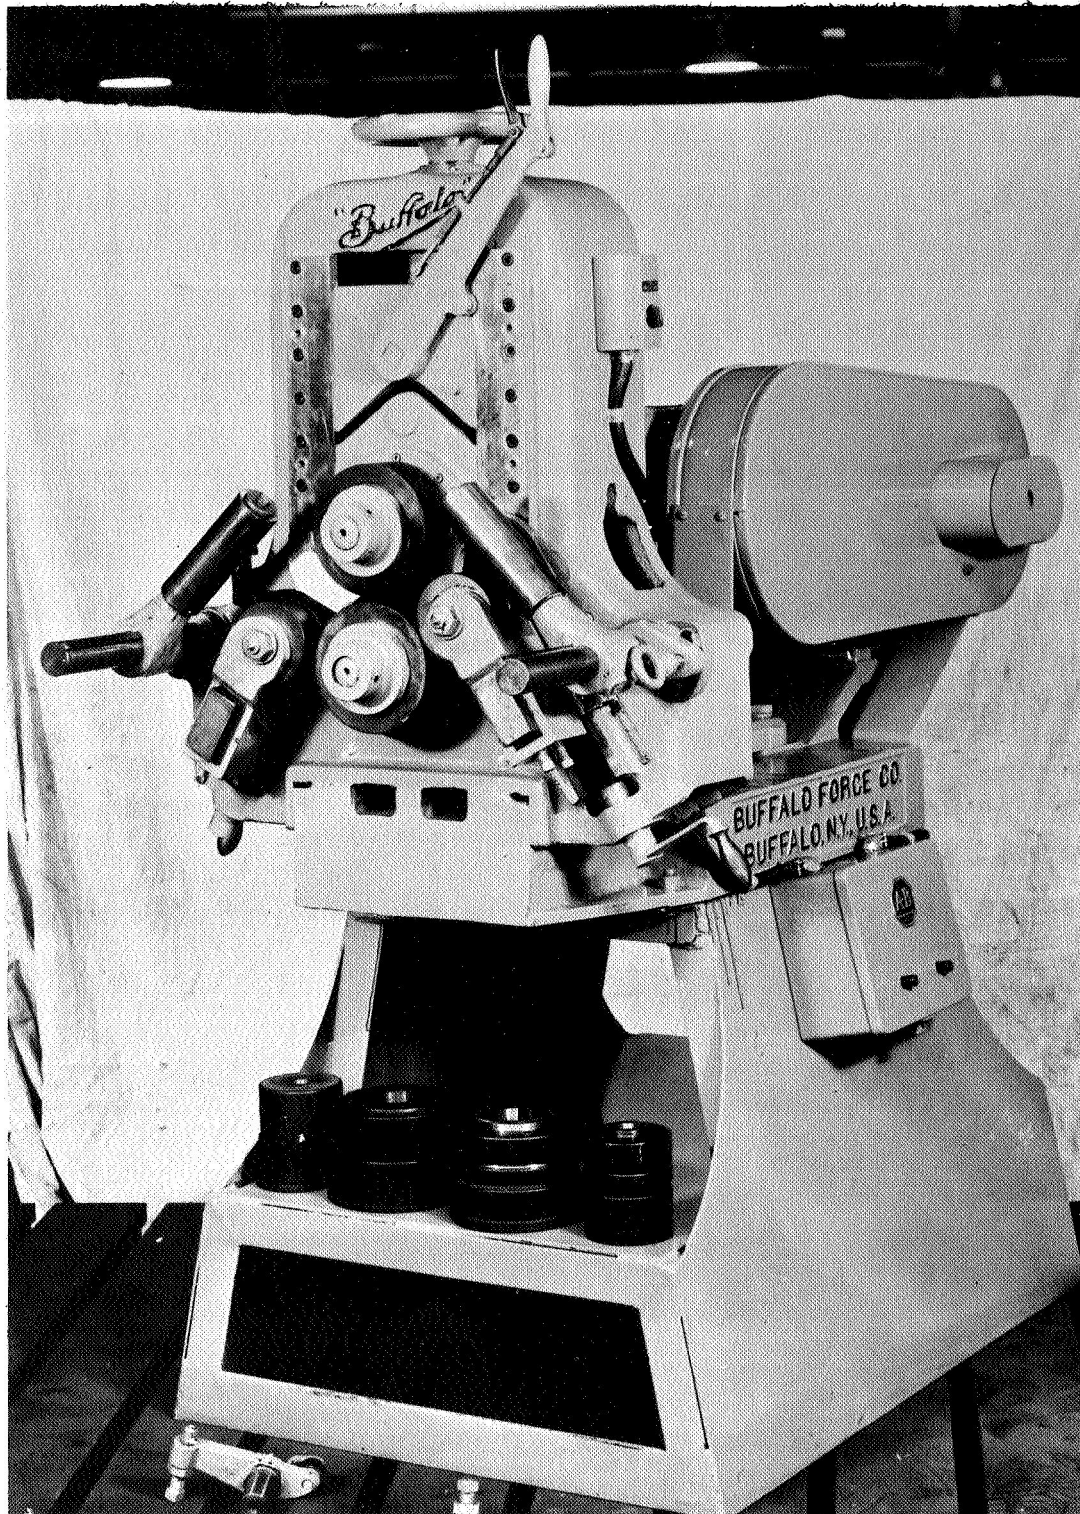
CONFIGURATION OF ROLLS IN AIRCRAFT PINCH-TYPE ROLL-BENDING MACHINE
